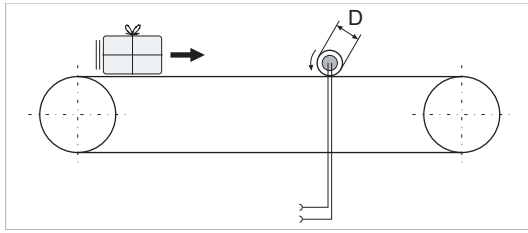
Mounting the rotary encoder with measurement wheel at the conveyor belt. D = Diameter of the measurement wheel.
